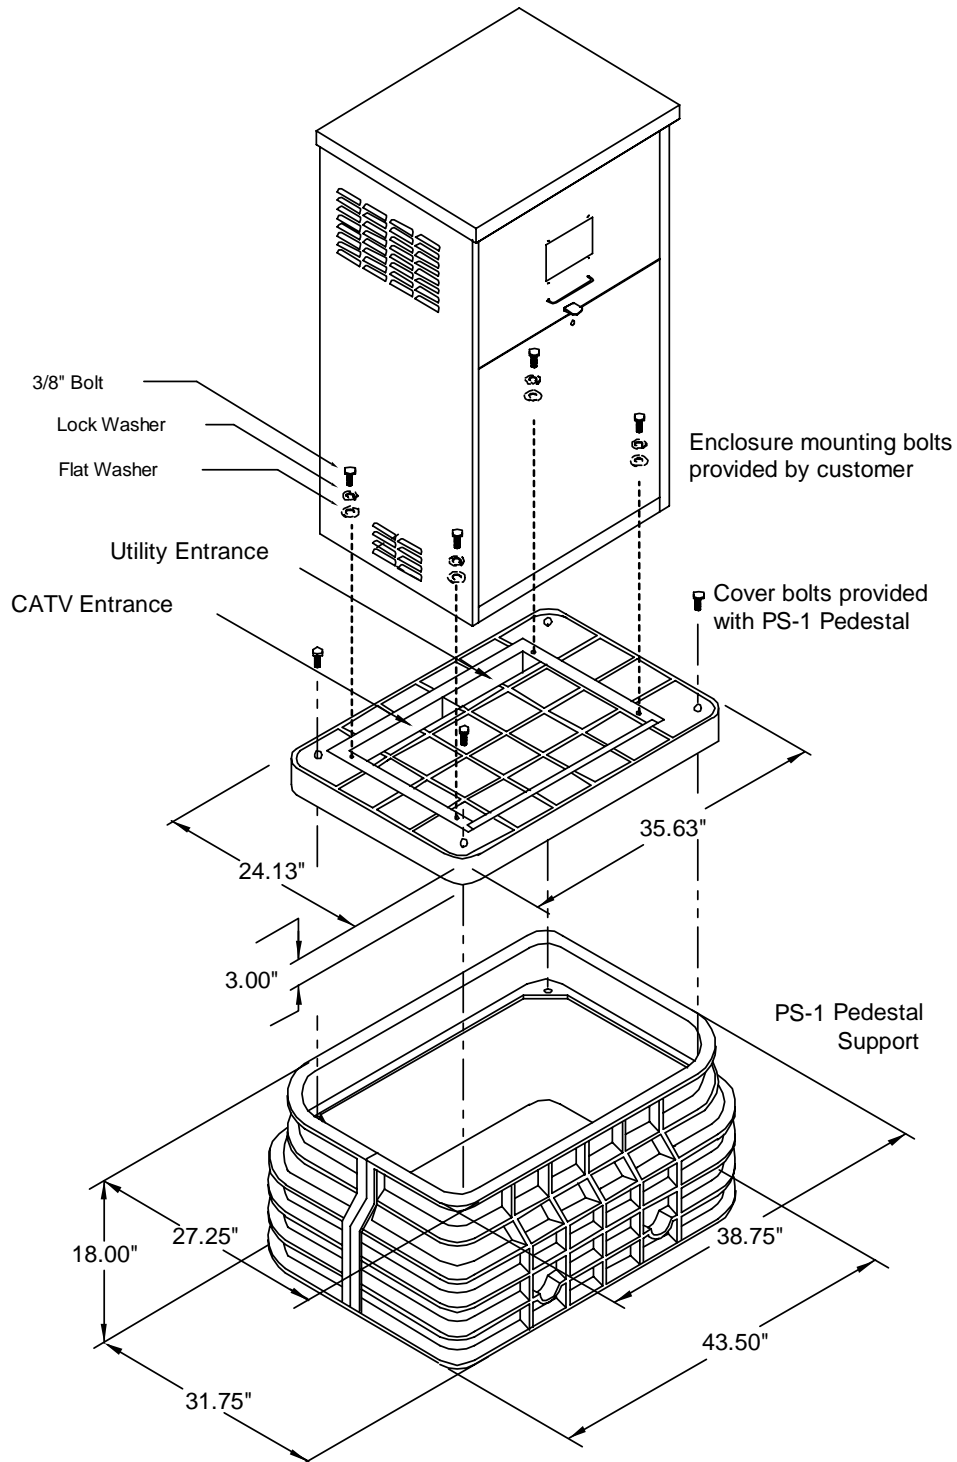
, Pedestal Support (PS-1) Dimensions
